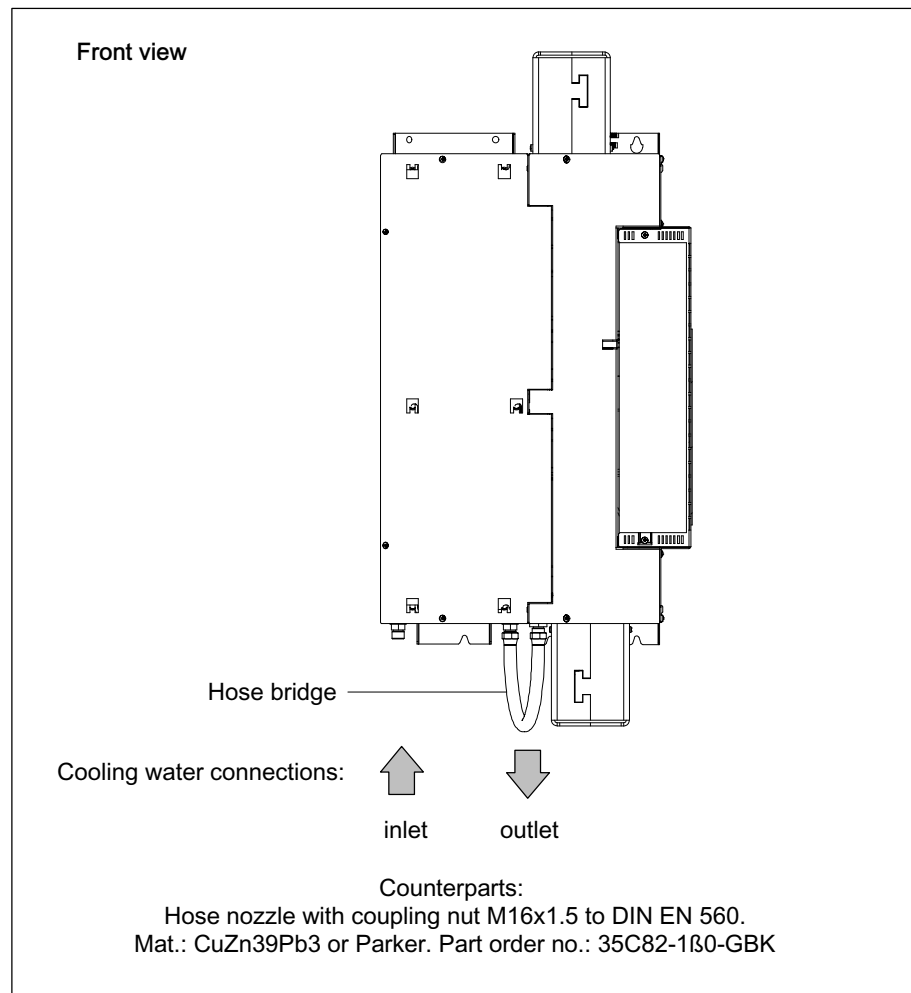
Location of cooling water connection: PSI 65xx.xxx W1
